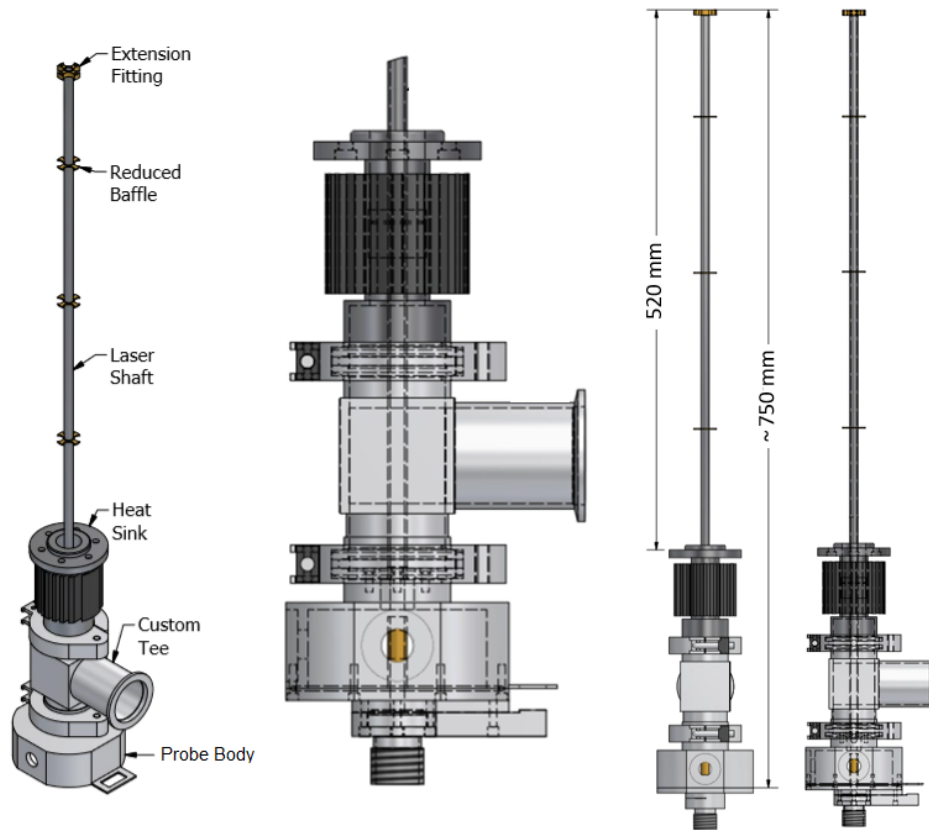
The NMR probe assembly showing overall length and appearance. This diagram shows the assembly without the probe extension and tip attached, as the probe would be loaded into the VTI.
